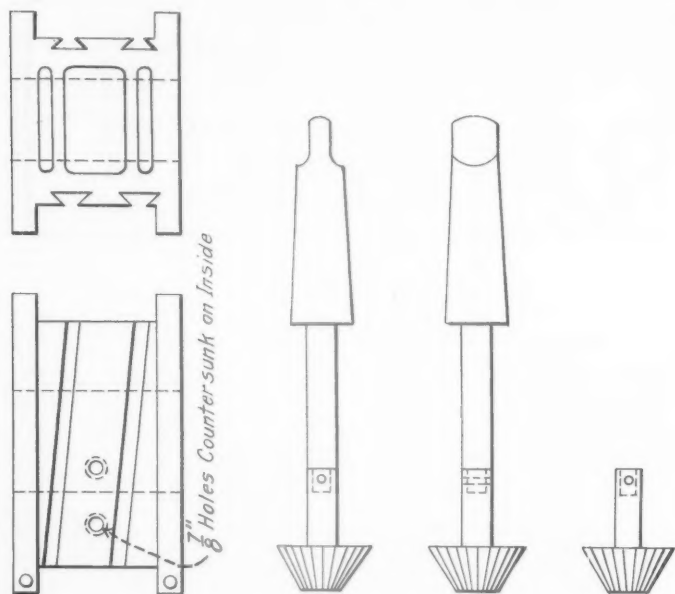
Showing Method of Dovetailing Boxes and the Special Tool for Countersinking Anchor Pin Holes
